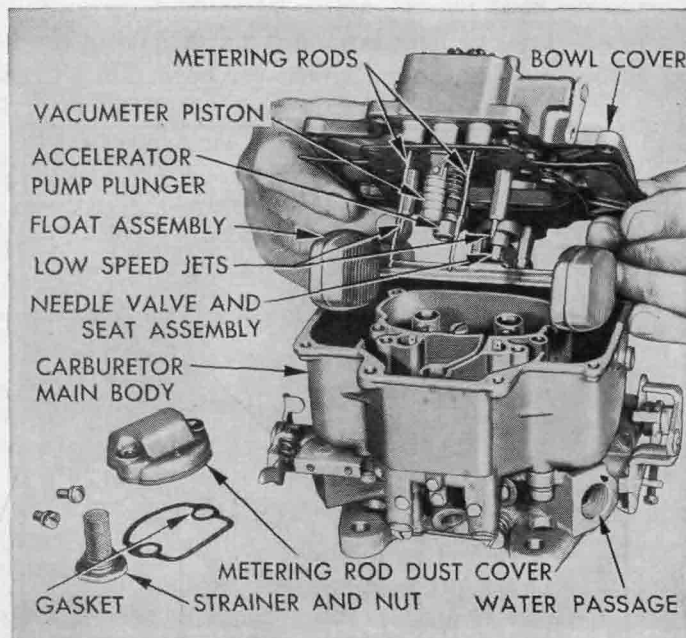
Dual carburetor (two-barrel) partly disassembled so that the dual-float assembly can be seen. (*Chrysler Sales Division of Chrysler Corporation*)
